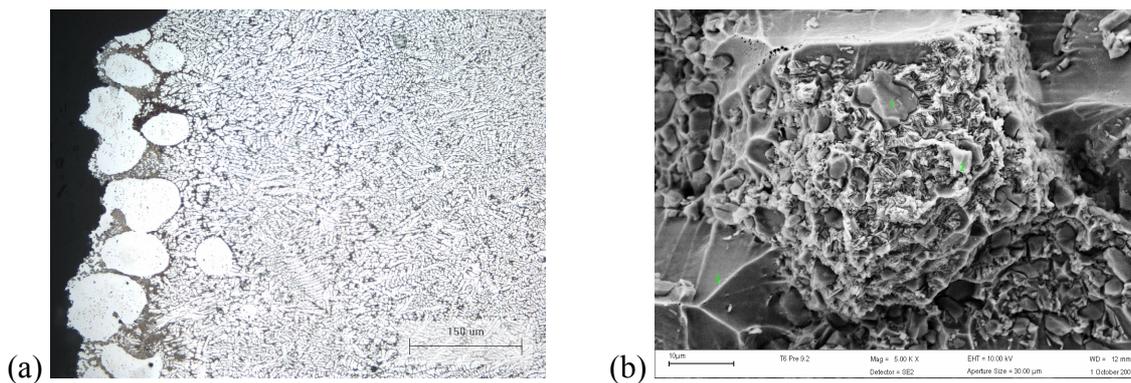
Microstructure of laser welded SSM A356 alloy after T6 heat treatment: (a) optical micrograph of HAZ after fracture and (b) SEM of fractured HAZ.
